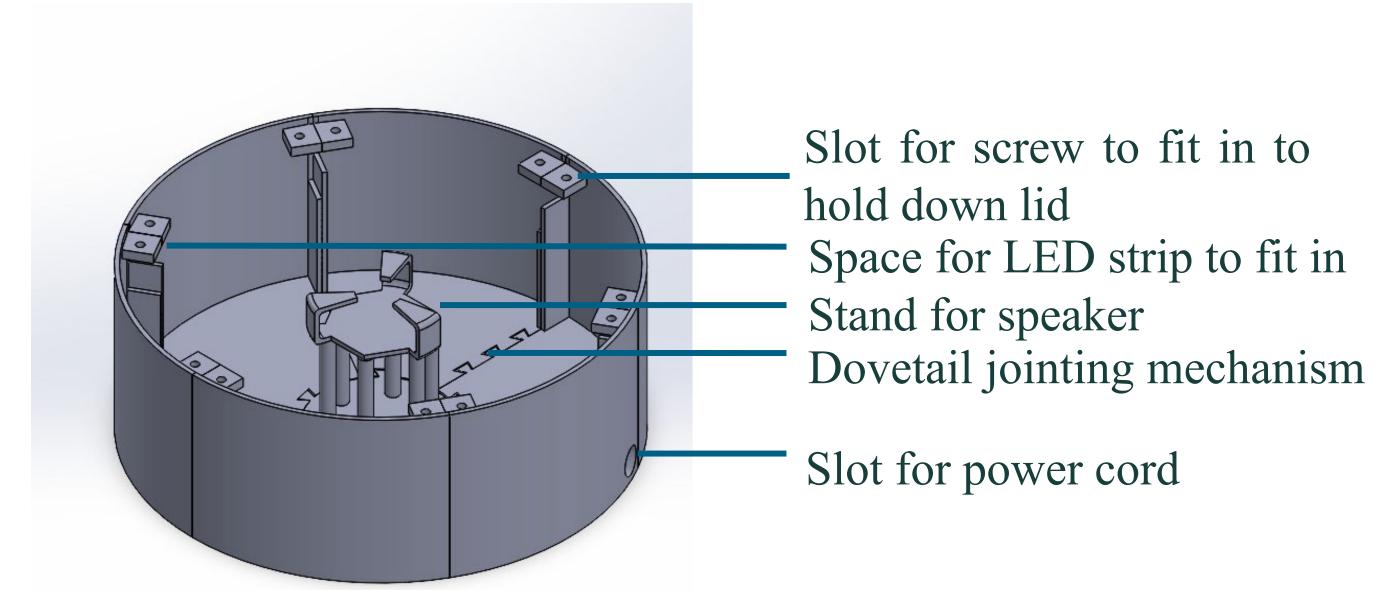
3D Model assembly of components making the base of the part. Parts were individually 3D-printed, then press-fit together, then the cracks were sealed using a soldering iron.
